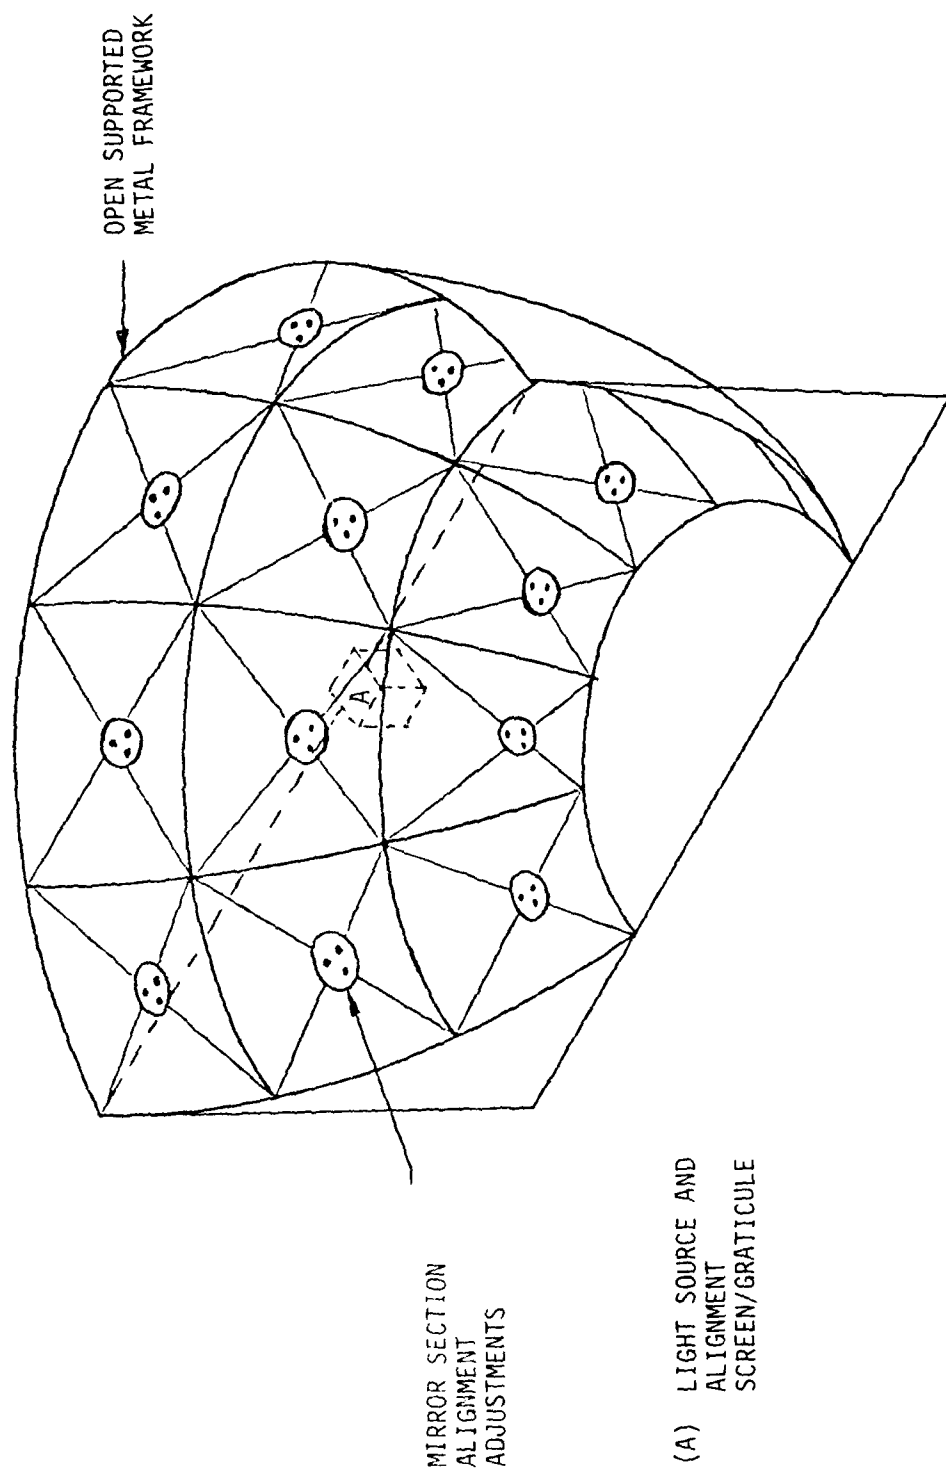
MIRROR ALIGNMENT FIXTURE
